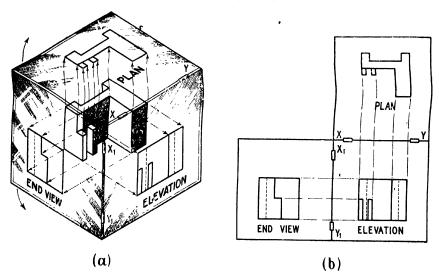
ILLUSTRATING THIRD ANGLE PROJECTION OF ELEVATION, PLAN, AND END VIEW
